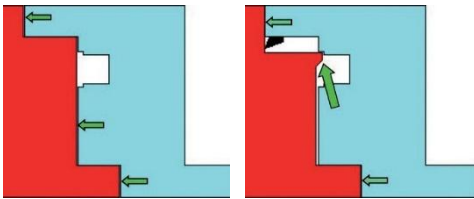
System without (left) and with seal (right) and support in the fitting groove
